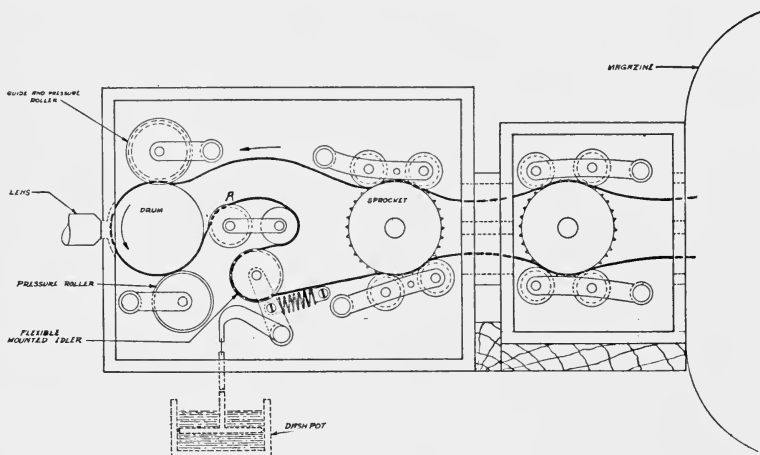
Sprocket and roller arrangement in first magnetic drive recorder.
